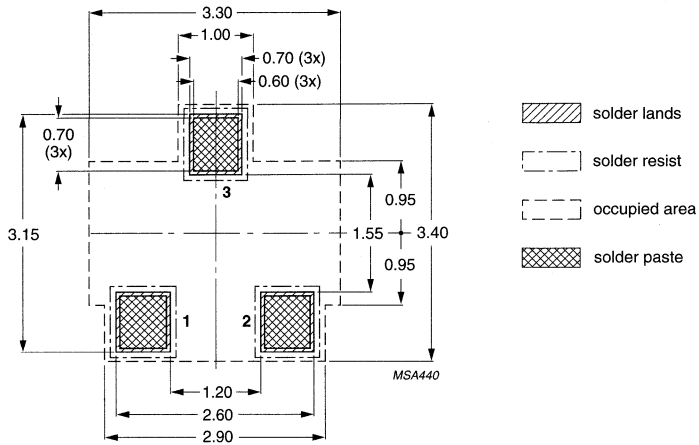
Reflow soldering footprint for SOT346 (SC59).
